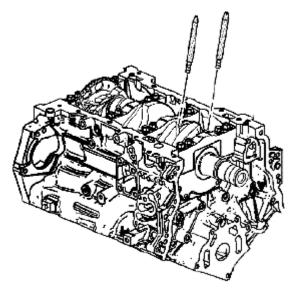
Identifying Piston And Connecting Rod Courtesy of SUZUKI OF AMERICA CORP.
